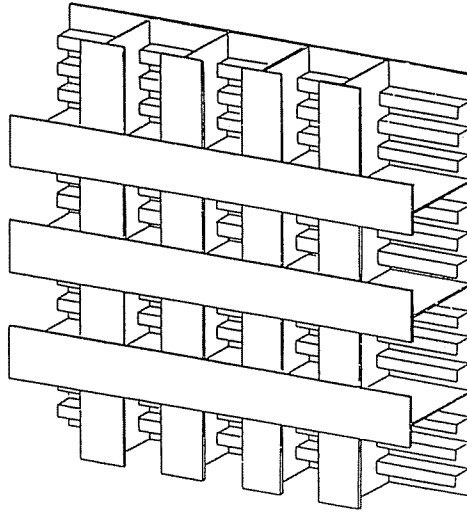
Stiffened plate panel (longitudinals, girders, web frames, etc.).
